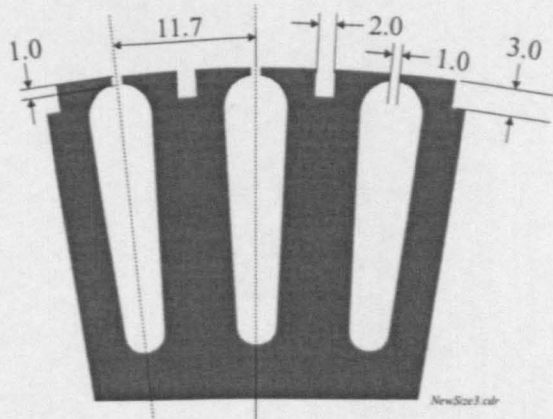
Mechanical dimensions for modified single cage Rotor#2
